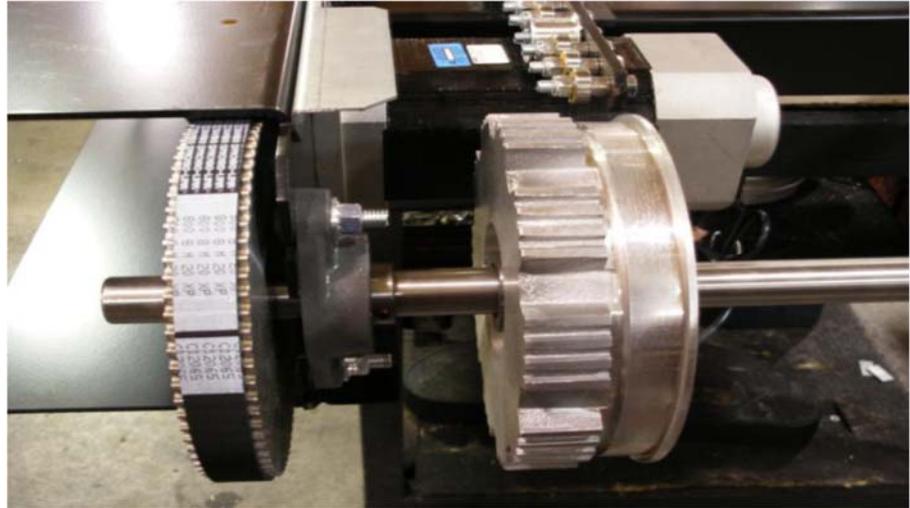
Picture of the carriage linear bearing grease fittings. NOTE: There are two other bearings located on the bottom side of the carriage (not shown in this picture).
